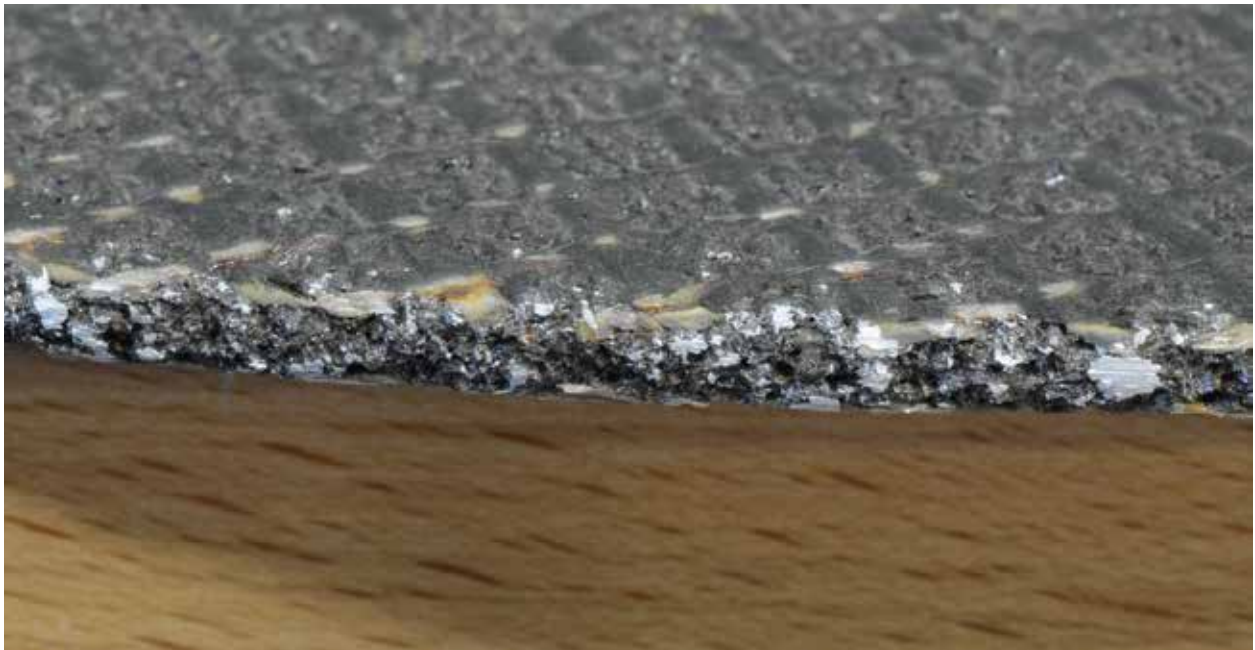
Metal Saw Blade, AL08, Dry Cuts
